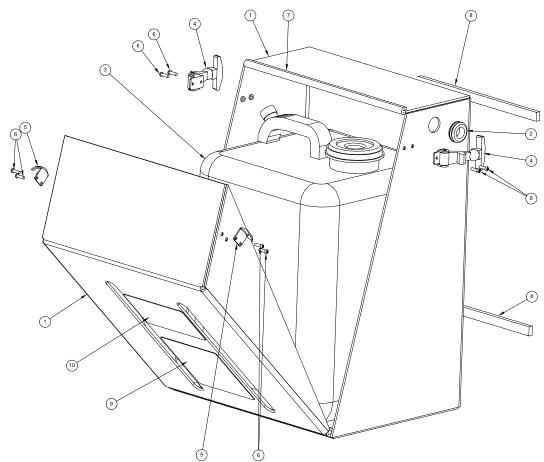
CDS 4.6/4.8 Diffuser Filter Assembly C-6554 Rev-
